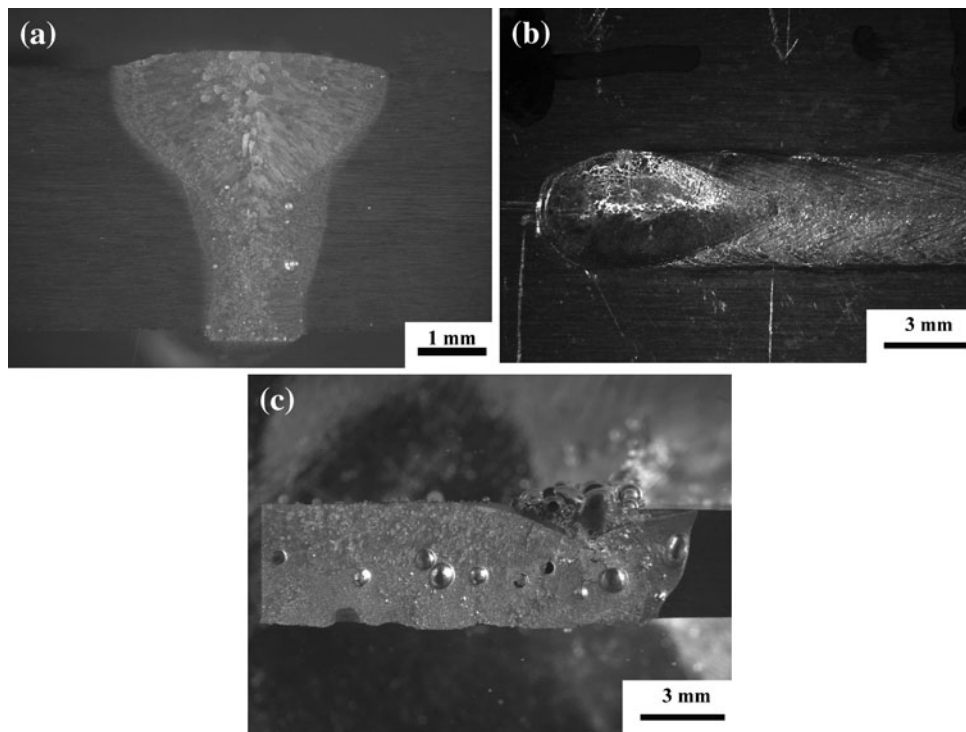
Laser beam weld of Al2198-T8 for energy deposition of 103 J/mm and beam focal point at 1 mm below top surface of workpiece. (a) Transverse cross section. (b) Top surface of workpiece. (c) Longitudinal cross section at symmetry plane. Beam power and welding speed are 3441 W and 2 m/min, respectively
